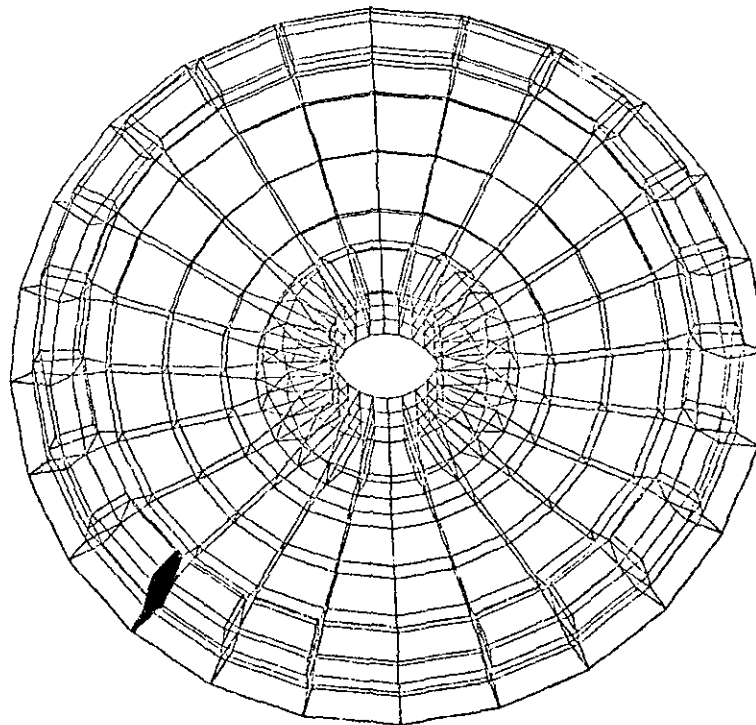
VIEW OF A 33 INCH WHEEL WITH ONE COMPLETE RADIAL FLANGE AND TREAD CRACK - ANSYS GEOMETRY
